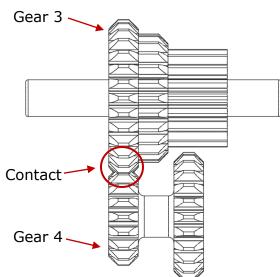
C Side View of Internal Gearing demonstrating contact between *Gear 3* and *Gear 4* as second position.
